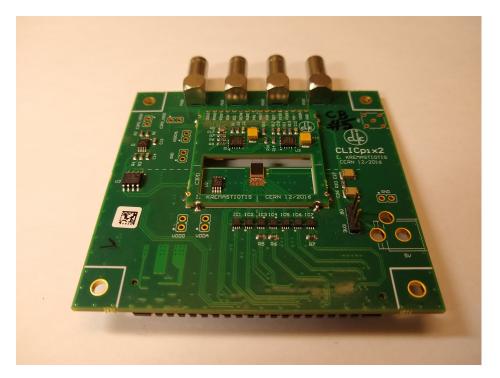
Photo of the CLICpix2/C3PD PCB.
